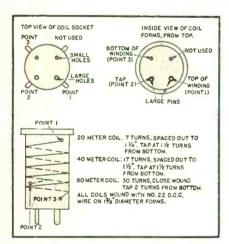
Complete mechanical and electrical details of coil assembly. Three separate coils are required to cover the 20, 40, and 80 meter bands.
